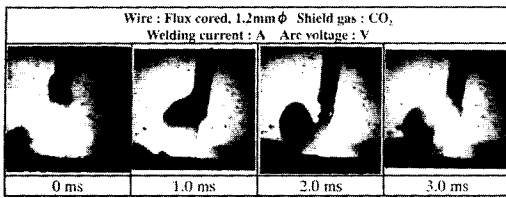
High speed (1,000fps) photographs showing metal transfer in flux cored arc welding
